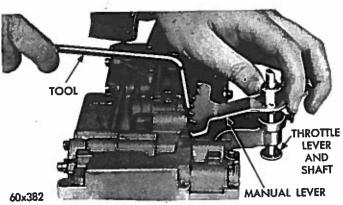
Installing Detent Ball, Spring and Manual Lever (Tool C-3765)
